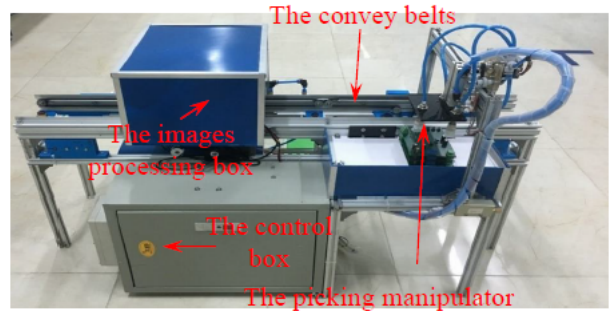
PCB Real-Time Automated Inspection System.
